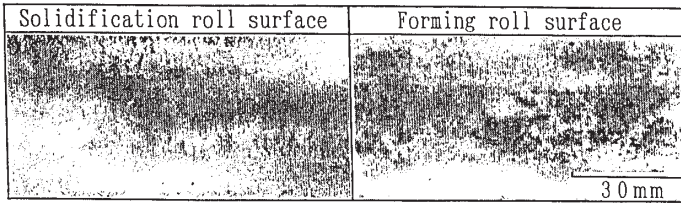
Surface of the strip cast by high pressure twin roll caster.
